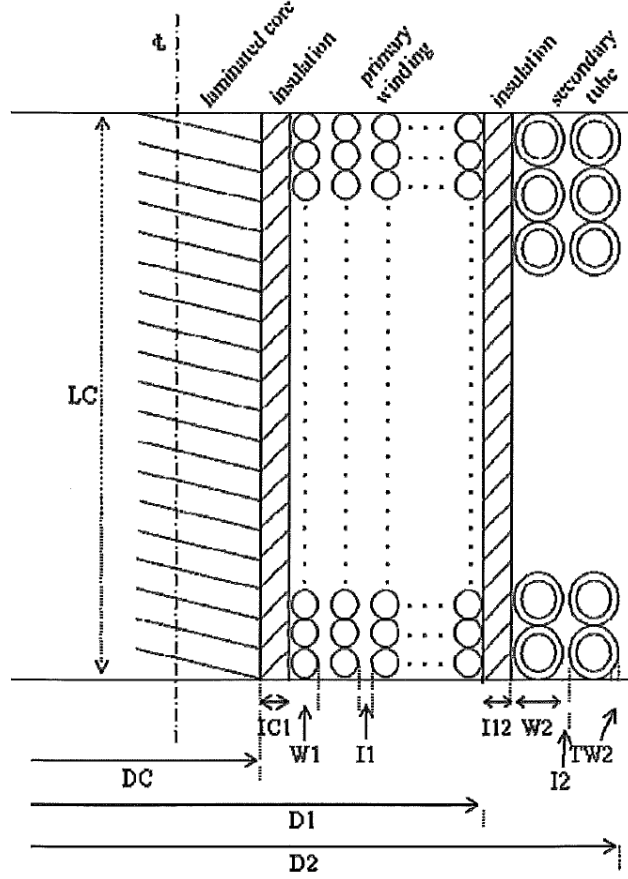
Cross-section of a multi-layer winding transformer heater with a full core.
